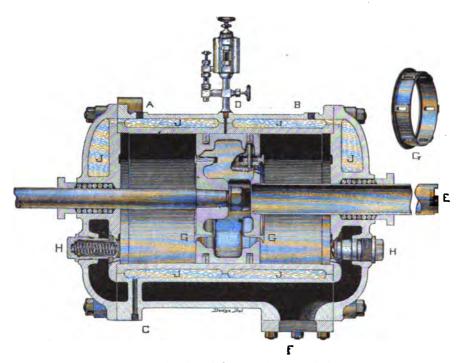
Section through Ingersoll-Sergeant Air Cylinder.
